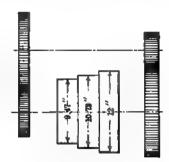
Lathe headstock with plain back gears, counter-shaft speeds 221 and 109 f.p.m., back gear ratio 4.11 to 1.
